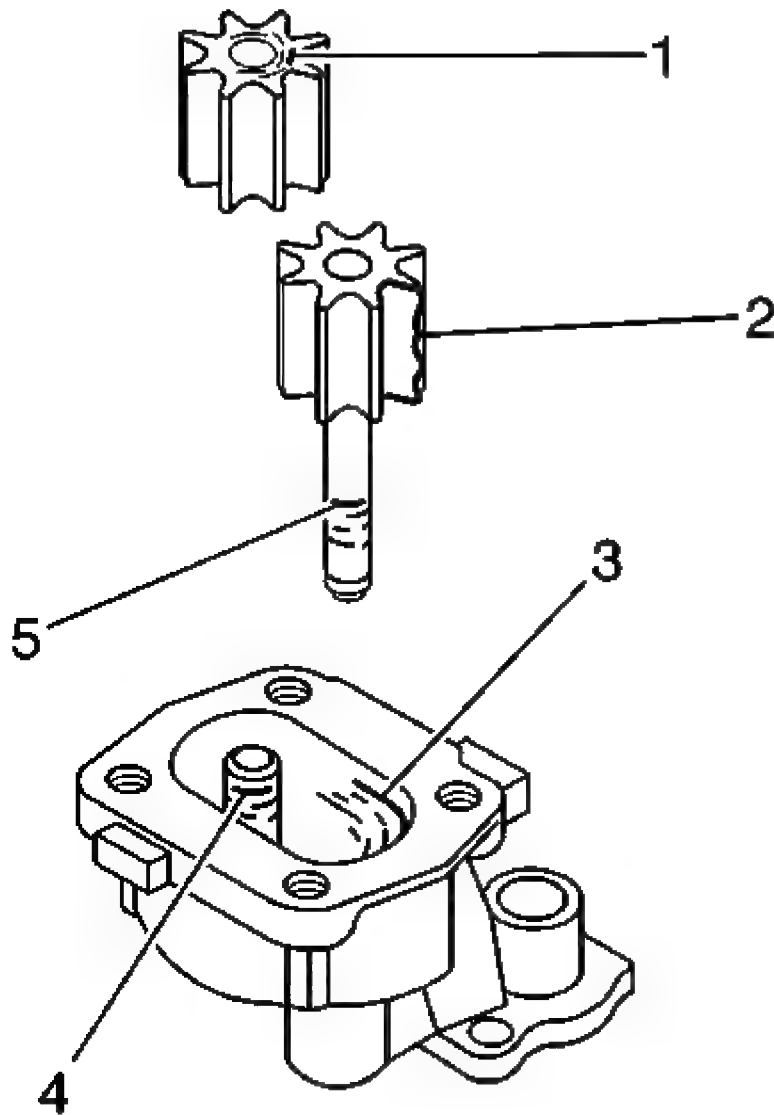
Inspecting Oil Pump Housing & Gears, Idler Shaft, & Drive Gear Shaft
